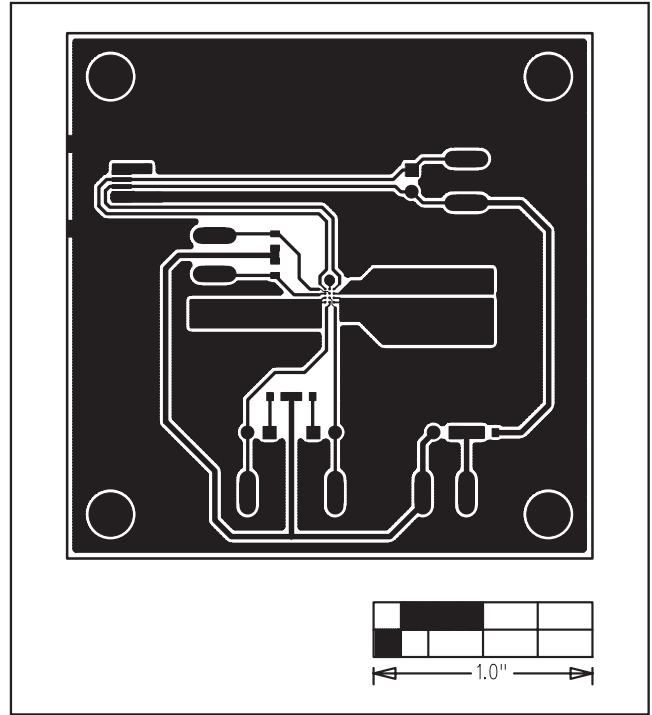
MAX14529E EV Kit PCB Layout—Component Side
